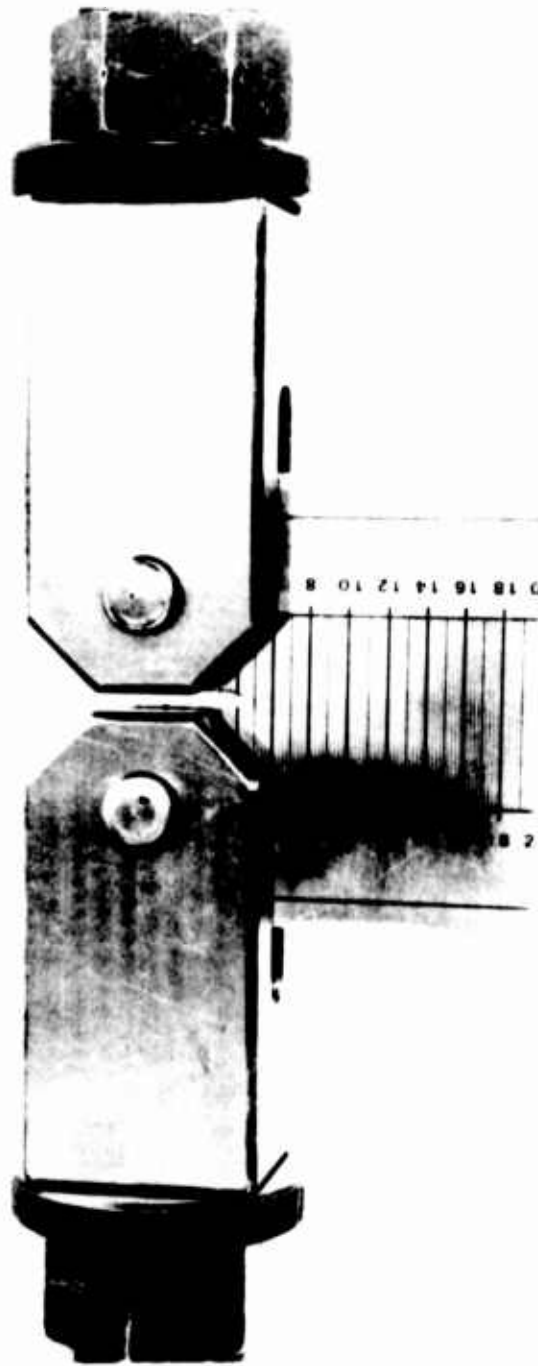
Compact Crack Propagation Specimen in Fatigue Machine
